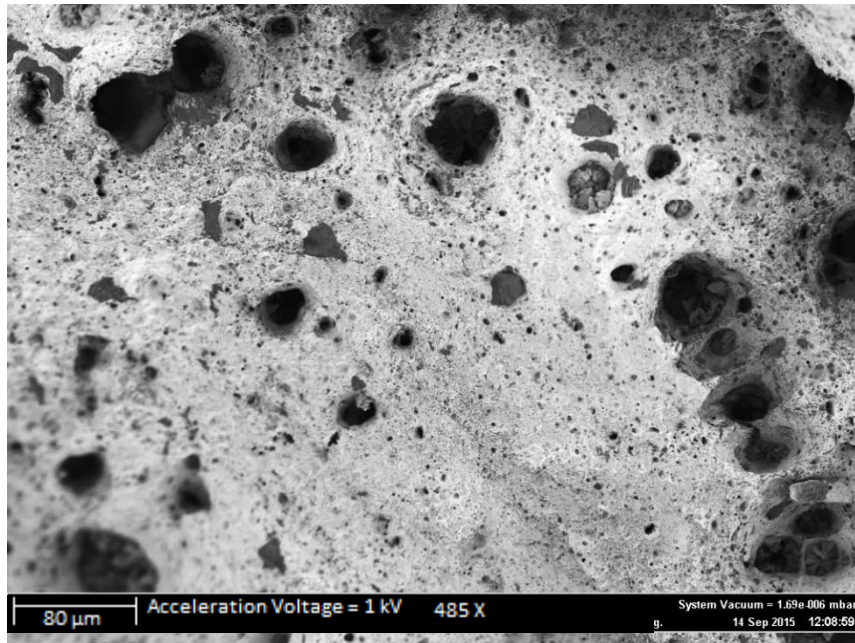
SEM image of the fracture surface of the reduced section hot round tensile test specimen of sample 3 using higher magnification than in Figure 100 (No heat treatment prior to welding and a 672h PWHT at 635°C). RA = 77%
